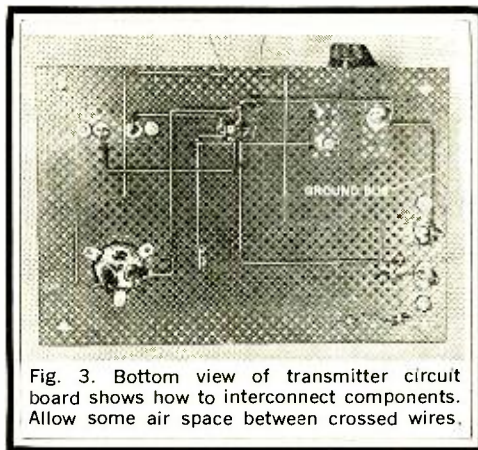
Bottom view of transmitter circuit board shows how to interconnect components. Allow some air space between crossed wires.
